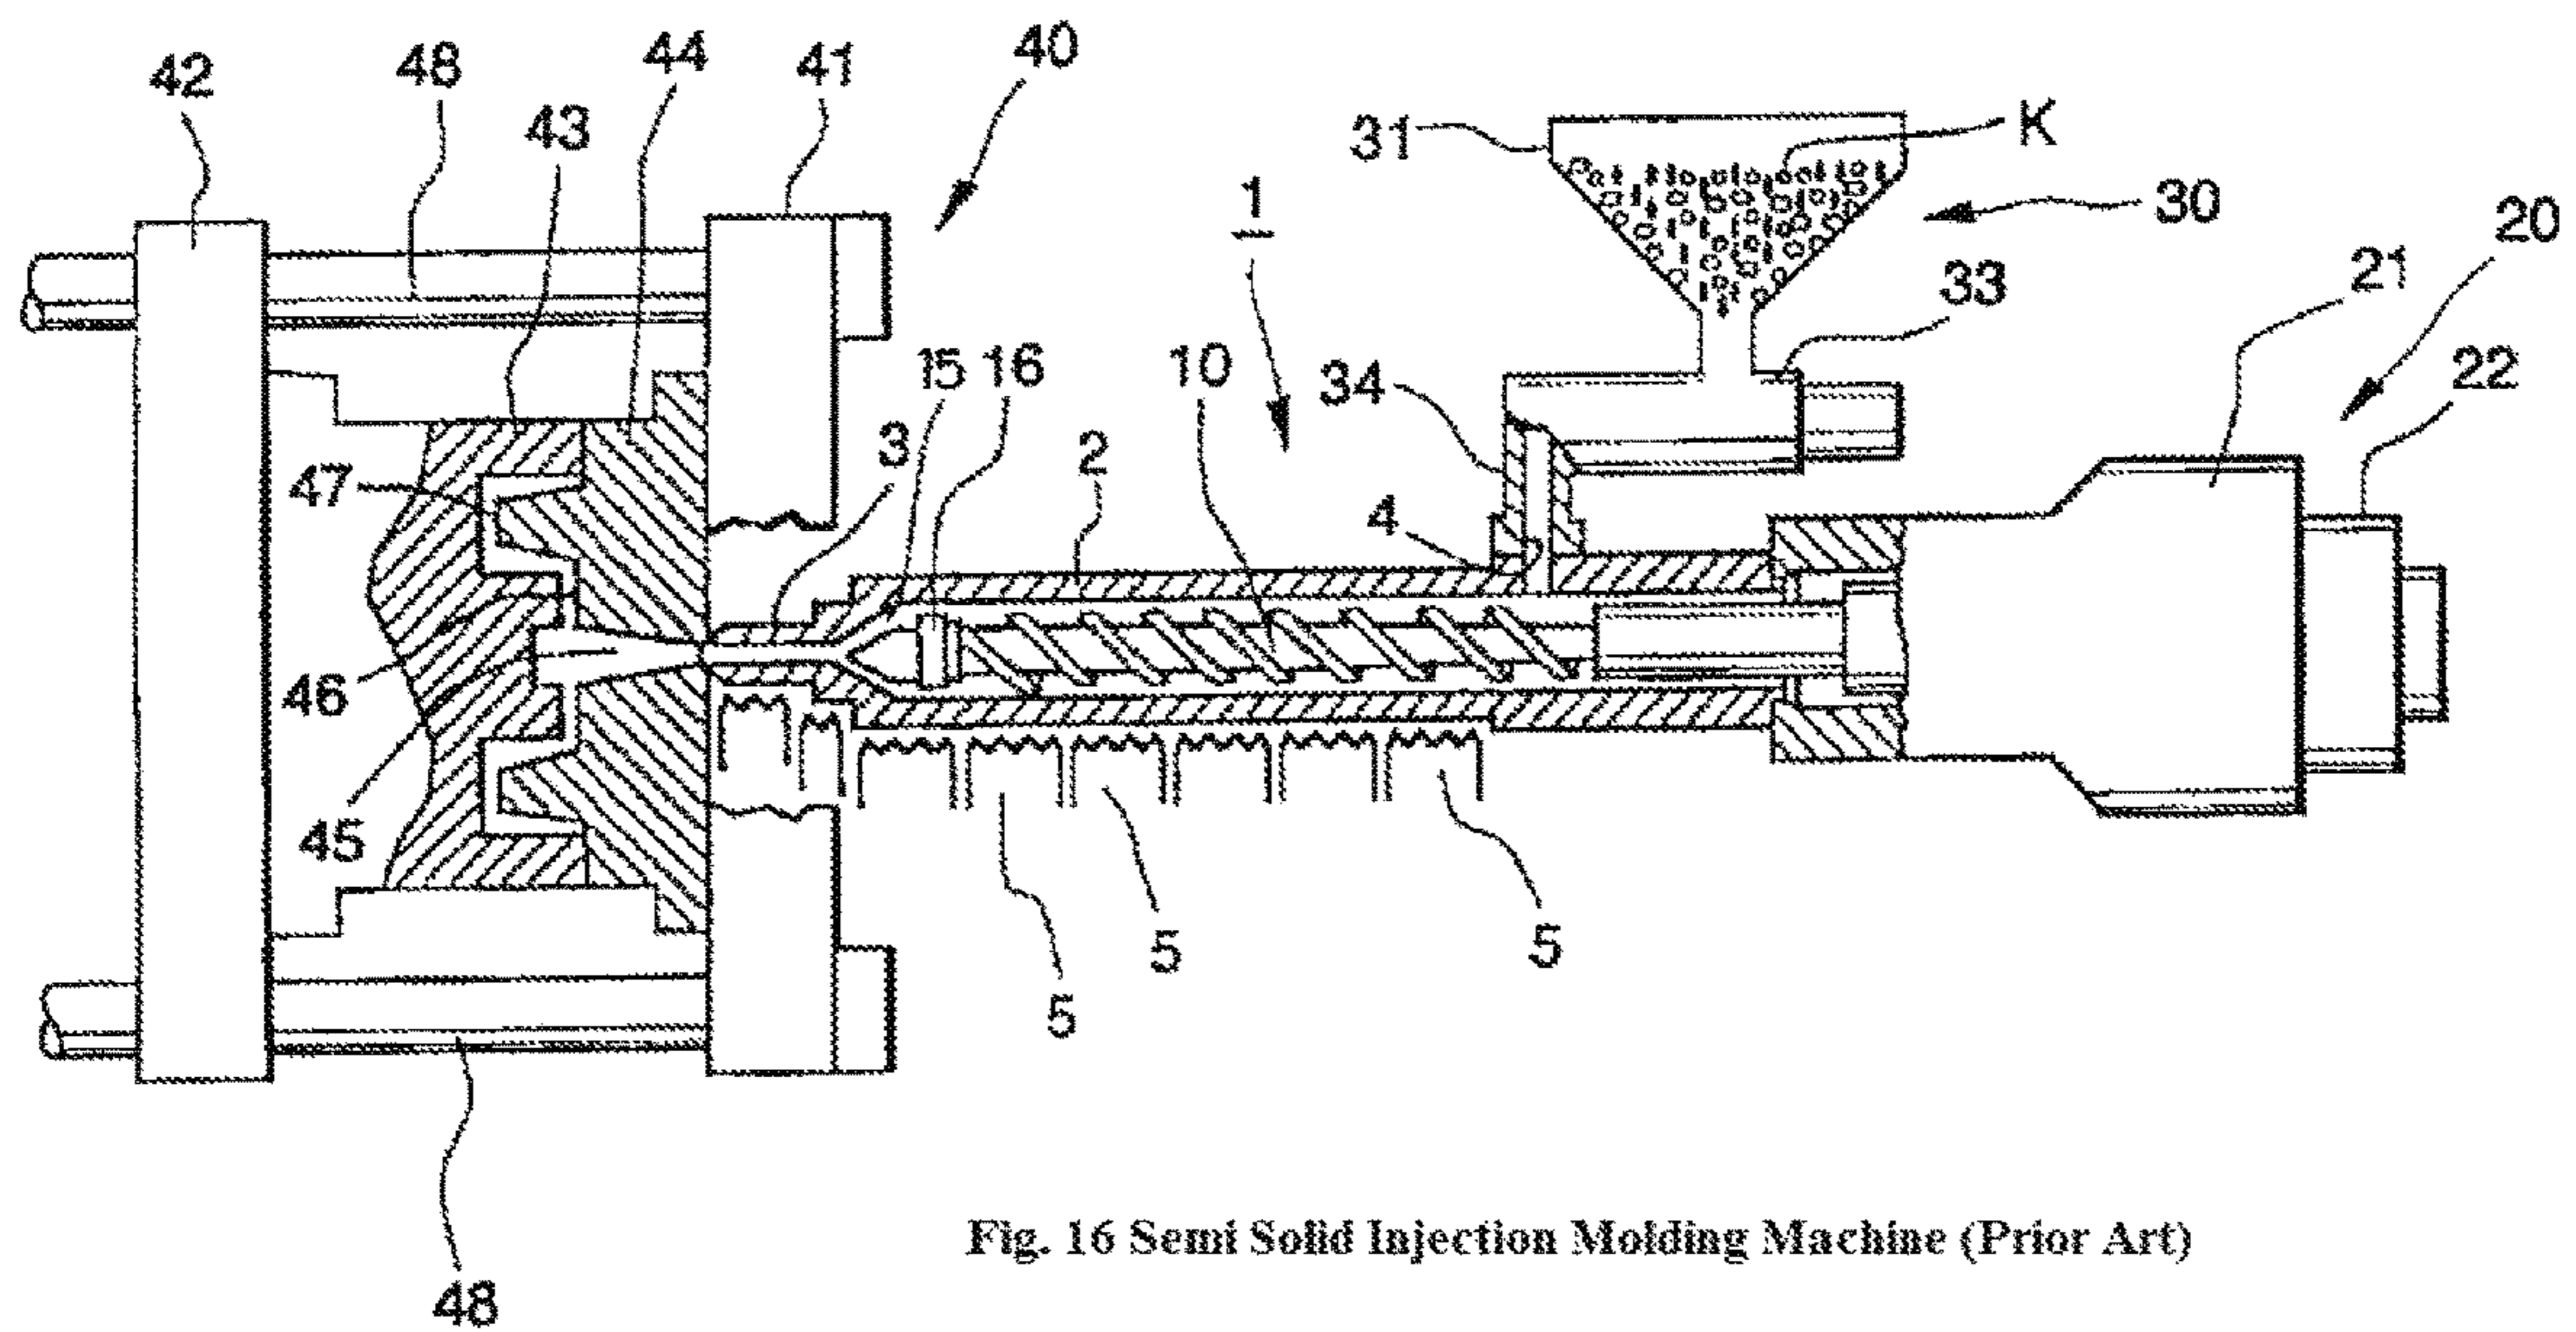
Semi Solid Injection Molding Machine (Prior Art)
